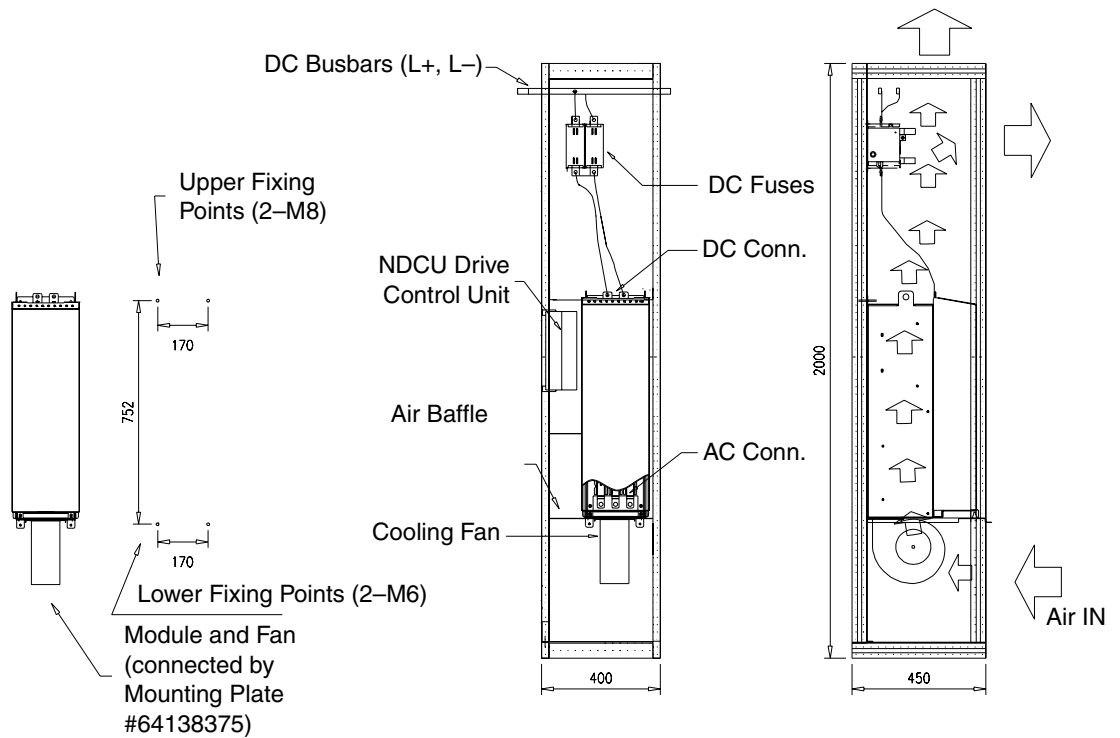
Cabinet layout example for R6i and R7i modules – Installation using mounting plate #64138375 and a separate air baffle.
